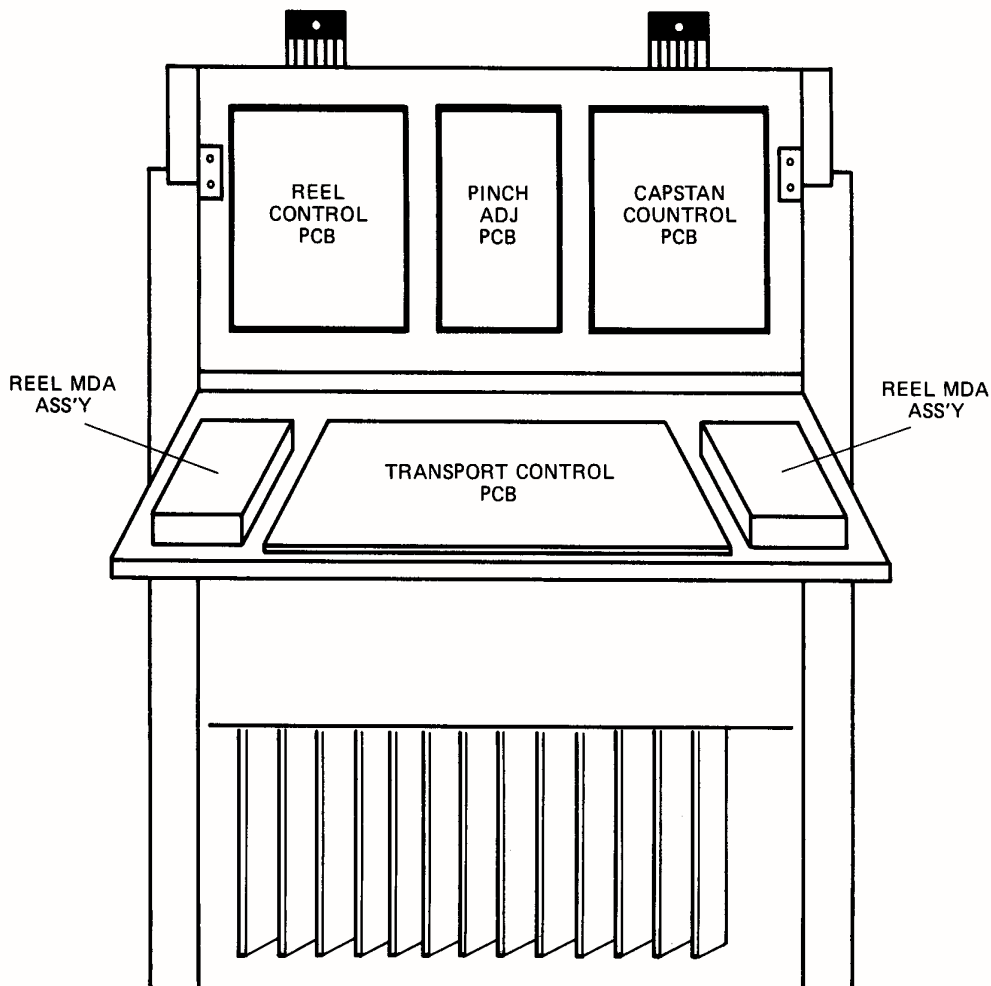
Location of Transport, Capstan, and Reel Control PCBs
